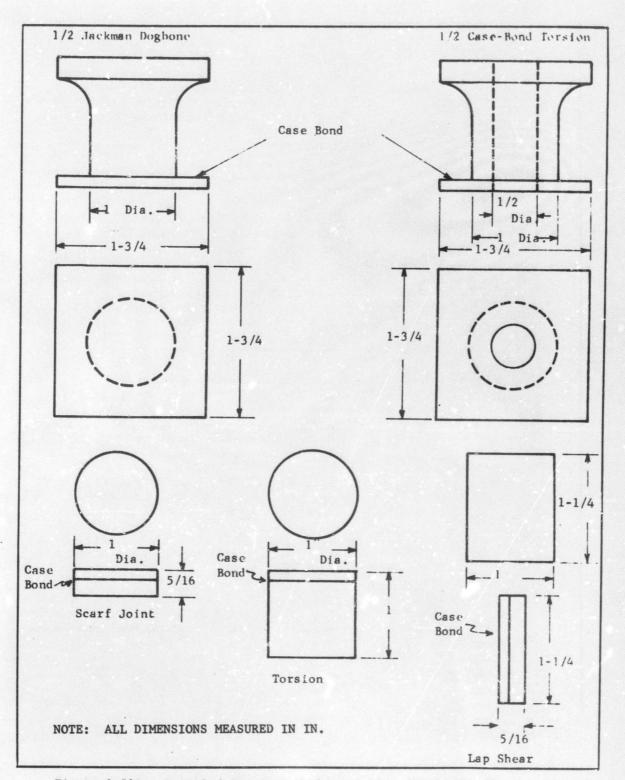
C. Detailed Specimen Machining Plan (Grain No. 2)
